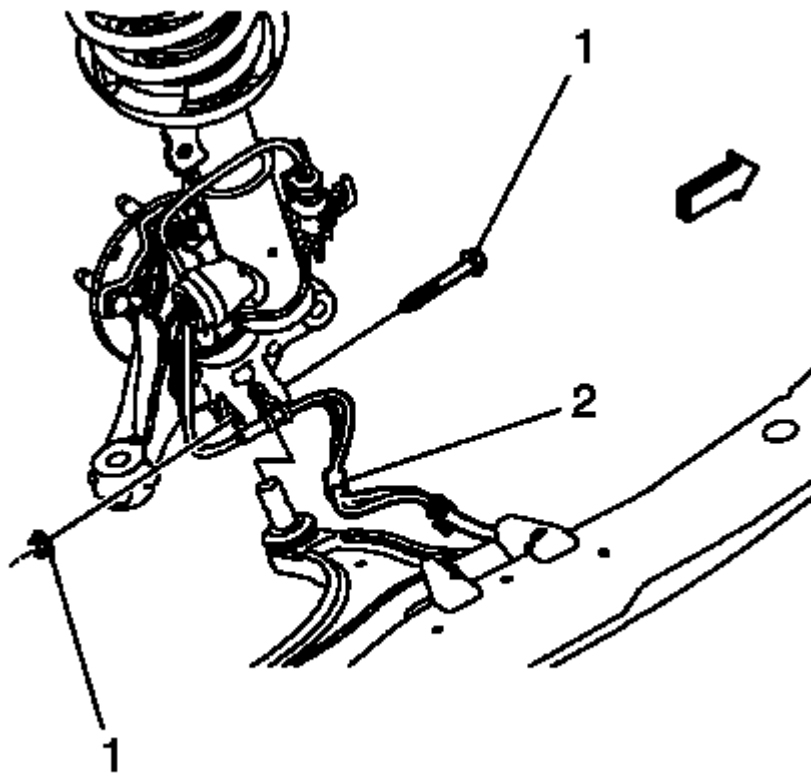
Electrical Harness And Power Steering Cooler Line Clips
